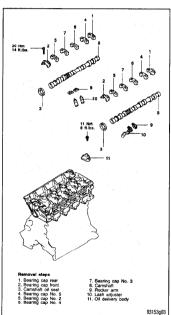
Camshaft and rocker arms—1.6L and 2.0L DOHC engines
